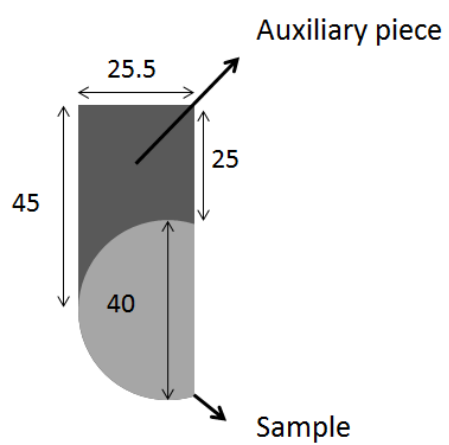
A schematic drawing of the cut sample fit into the auxiliary piece (dimensions in millimeters).
